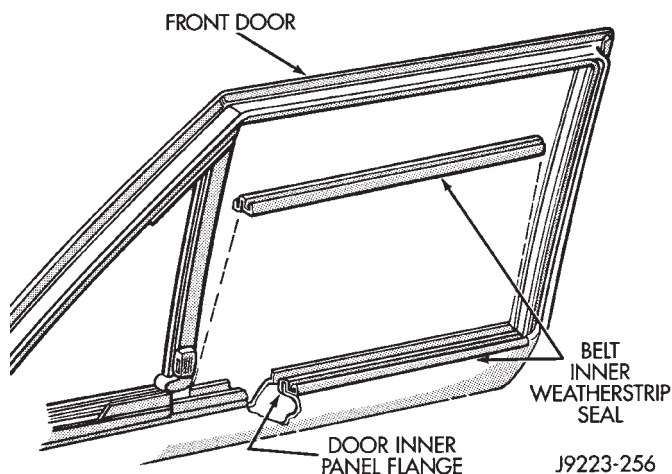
Front Door Belt Inner Weatherstrip Seal
